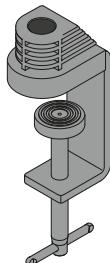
Fastening element. Fig. 2: Mounting the light to the fastening element.
